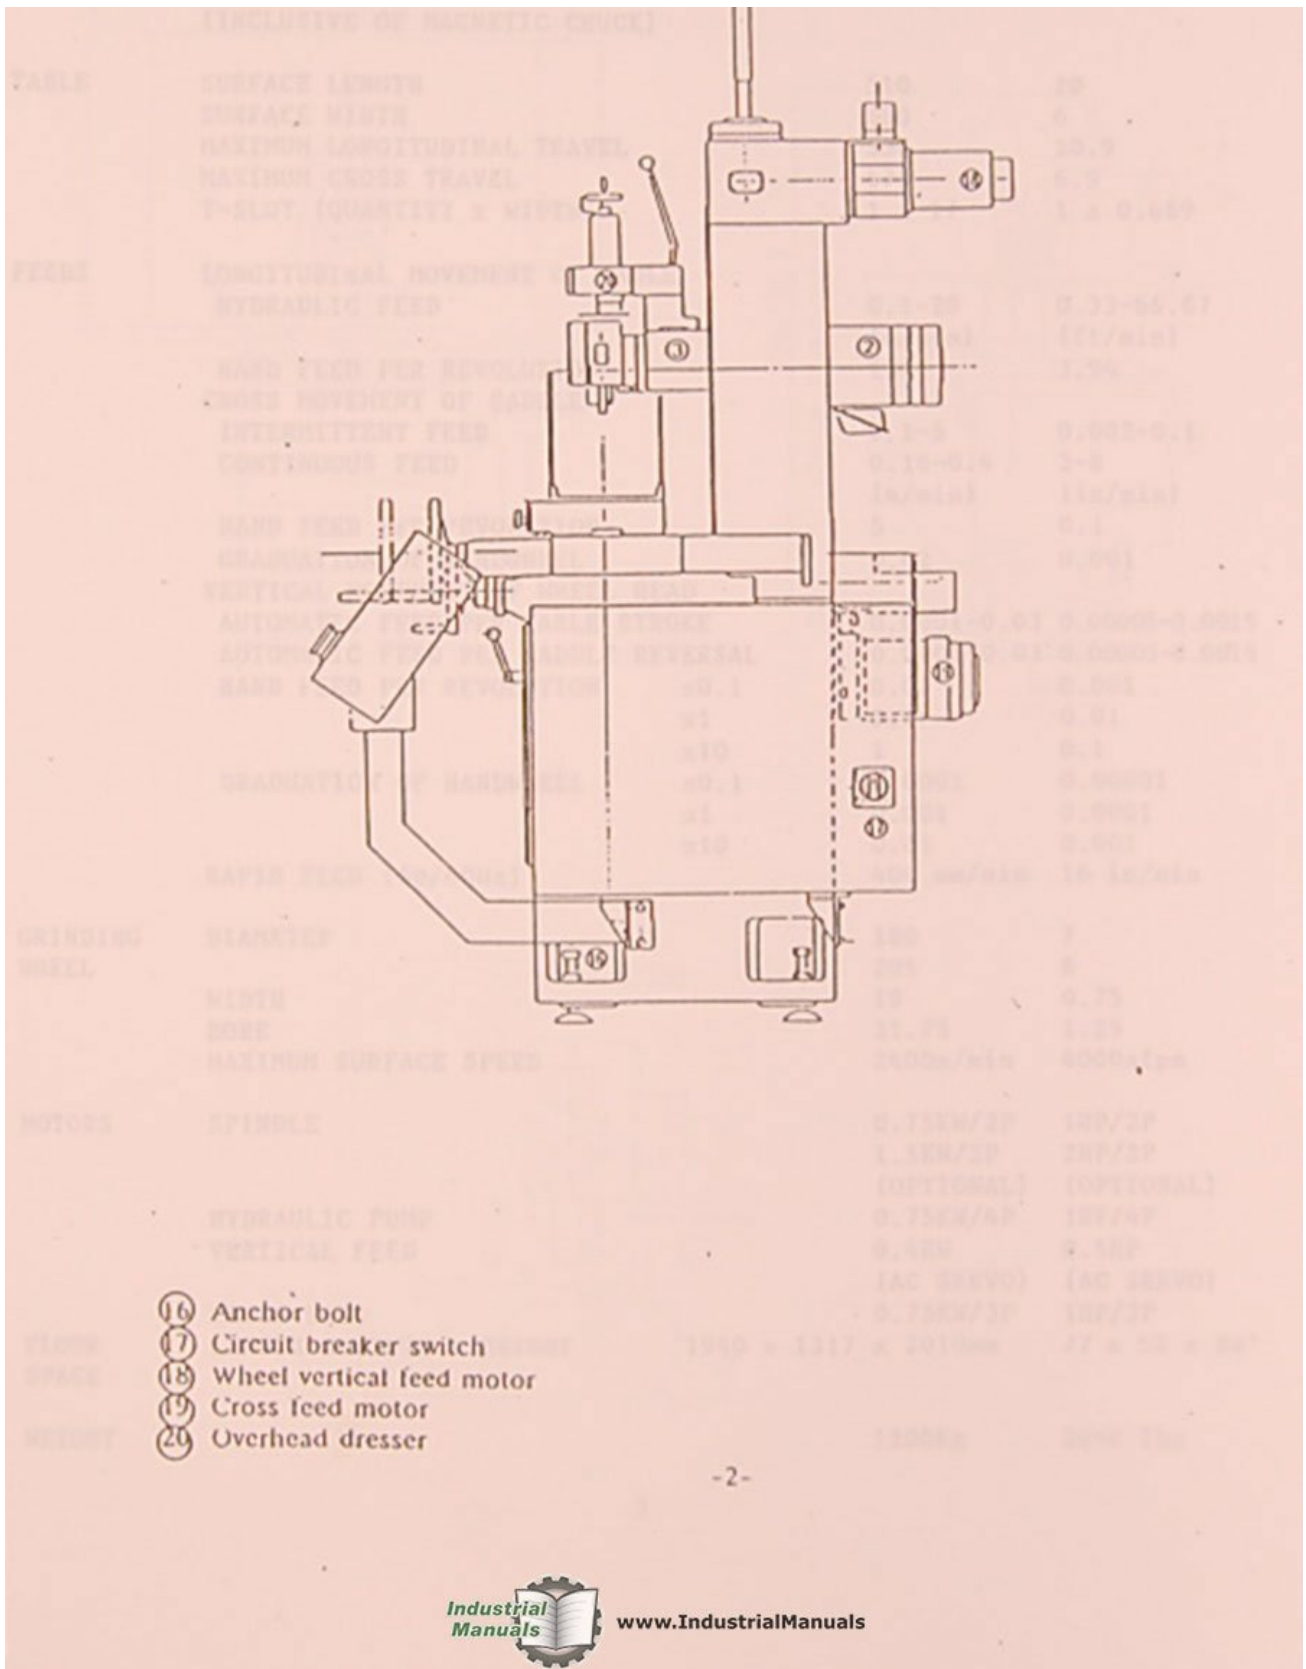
Side view of the Okamoto PFG-450DXA ACC-6.18DX3 Form Grinding Machine. This view highlights additional components including the anchor bolt, circuit breaker switch, wheel vertical feed motor, cross feed motor, and overhead dresser.
